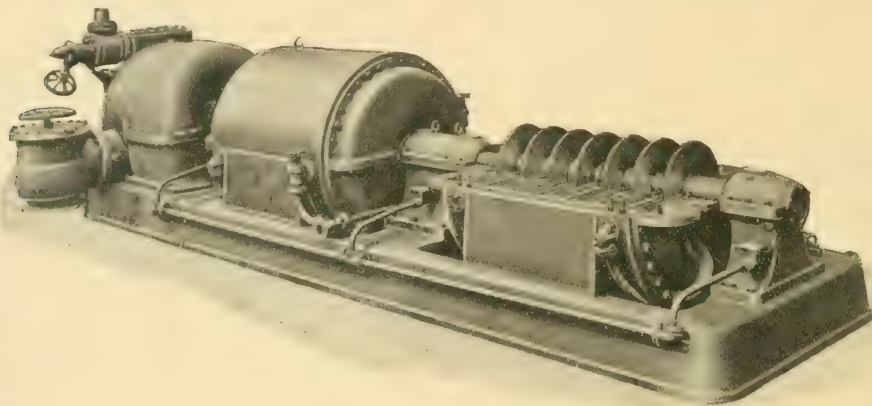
B.T.H. TURBO-COMPRESSOR, WITH CASING REMOVED.
